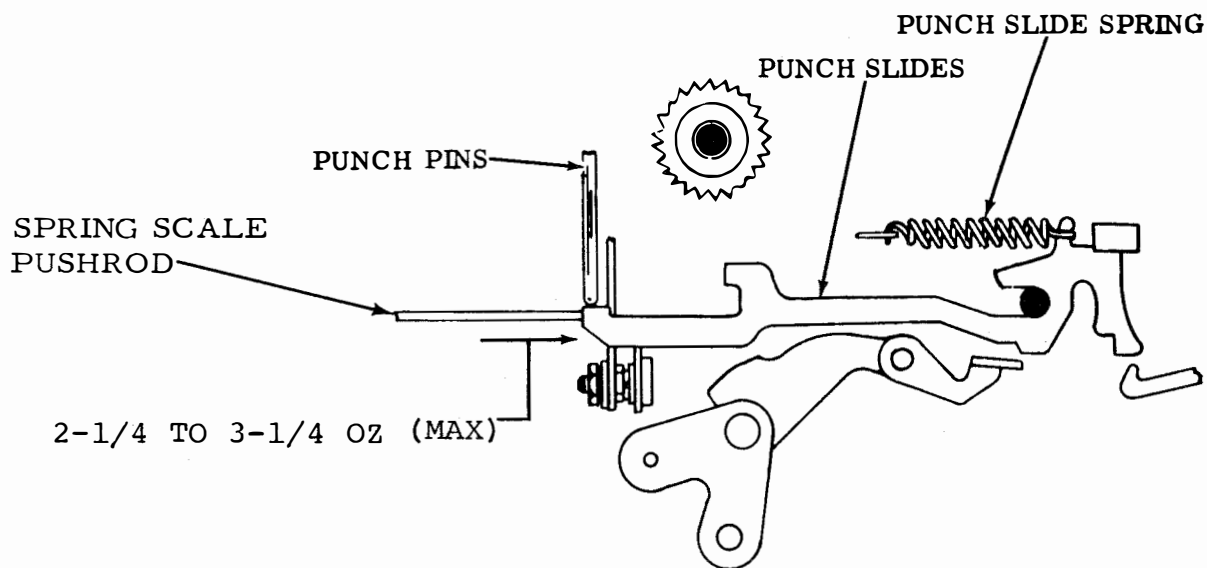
Punch Slide Spring (For Chadless Tape), Front View
